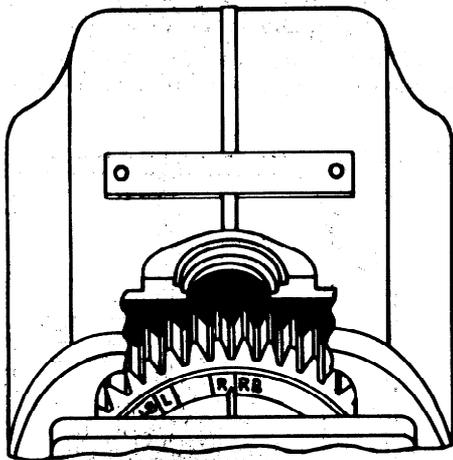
Alignment of Timing Marks on Distributor Gear — 6 Cylinder, Retard Breaker, Right Hand Rotation
